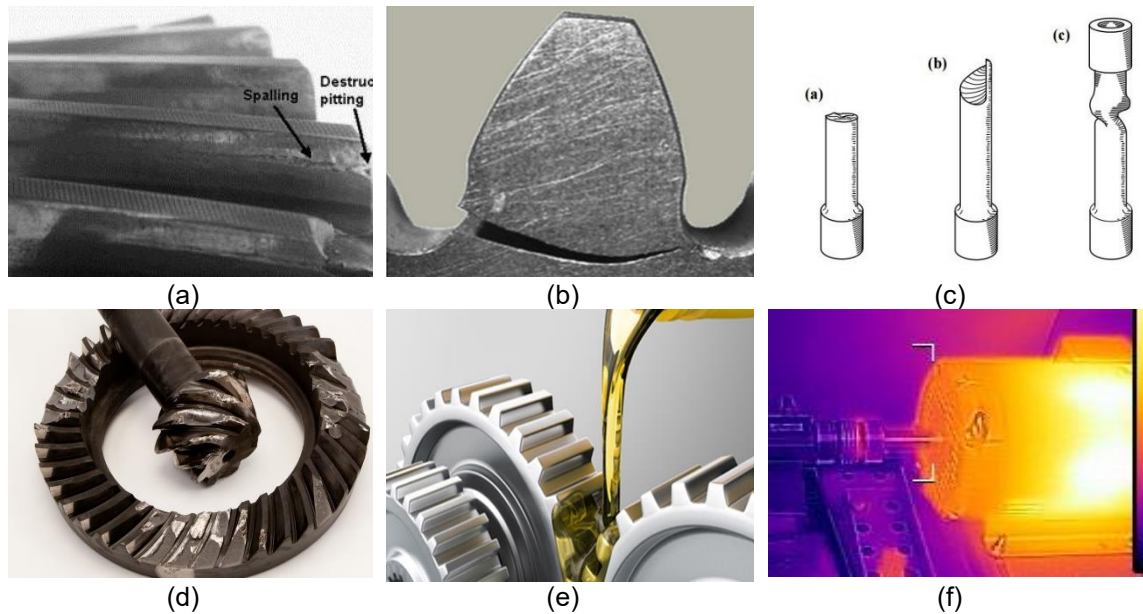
Mechanical gearbox failure modes (a) spalling [12], (b) tooth breakage[13], (c) torque overload, (d) tooth wear [14], (e) lubrication [15], (f) overheating.
